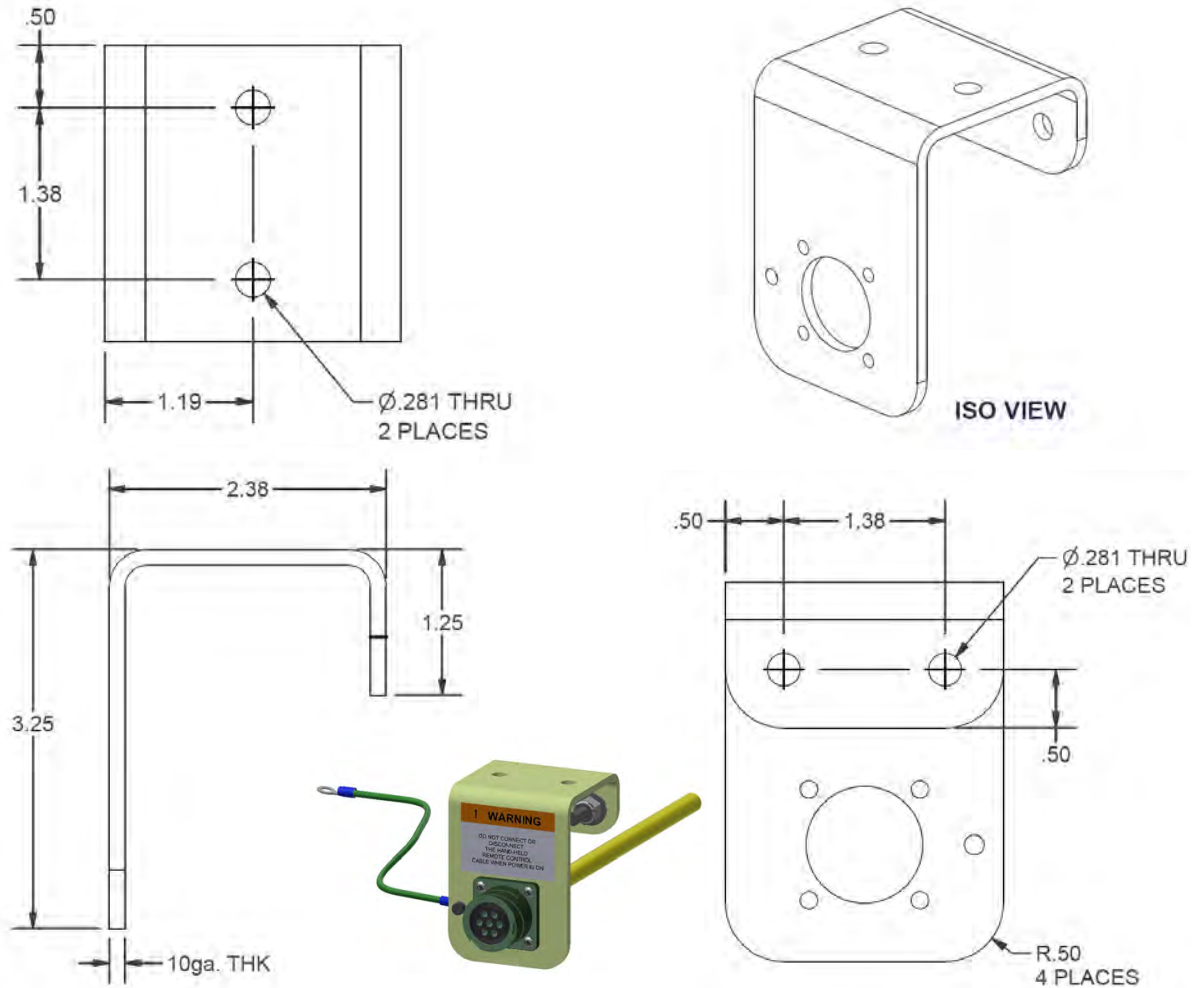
HHRC Bulkhead Bracket Installation Dimensions
